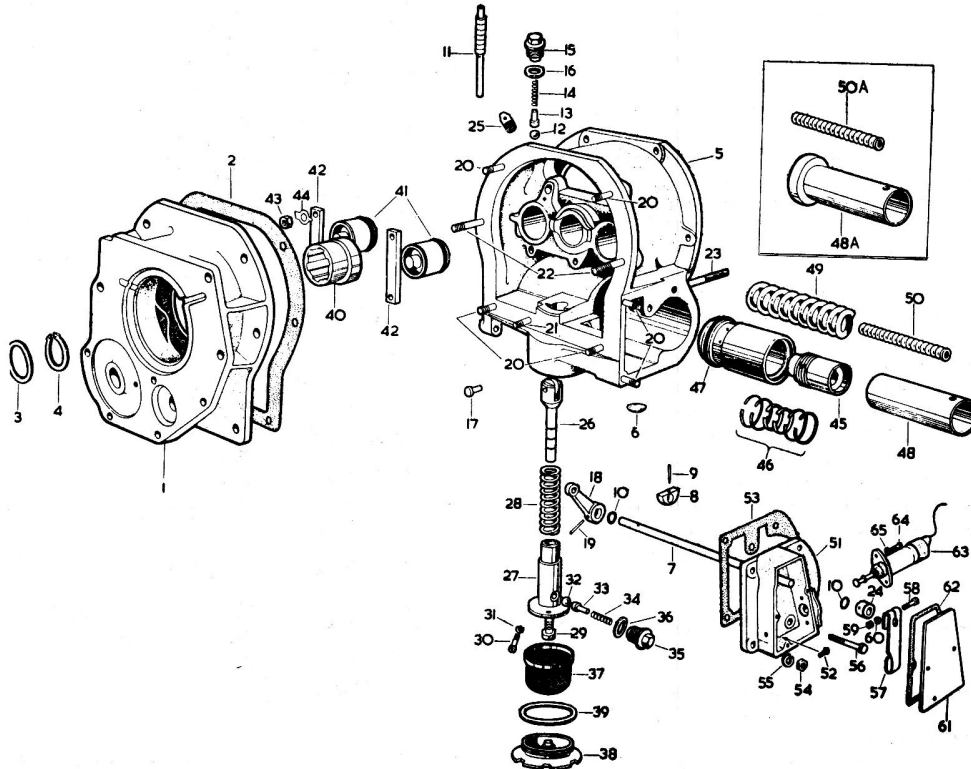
THE FRONT CASING ASSEMBLY 'A' TYPE UNIT
